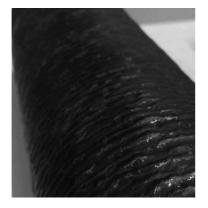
Sample overlay welded in protection of twocomponent gas mixture
